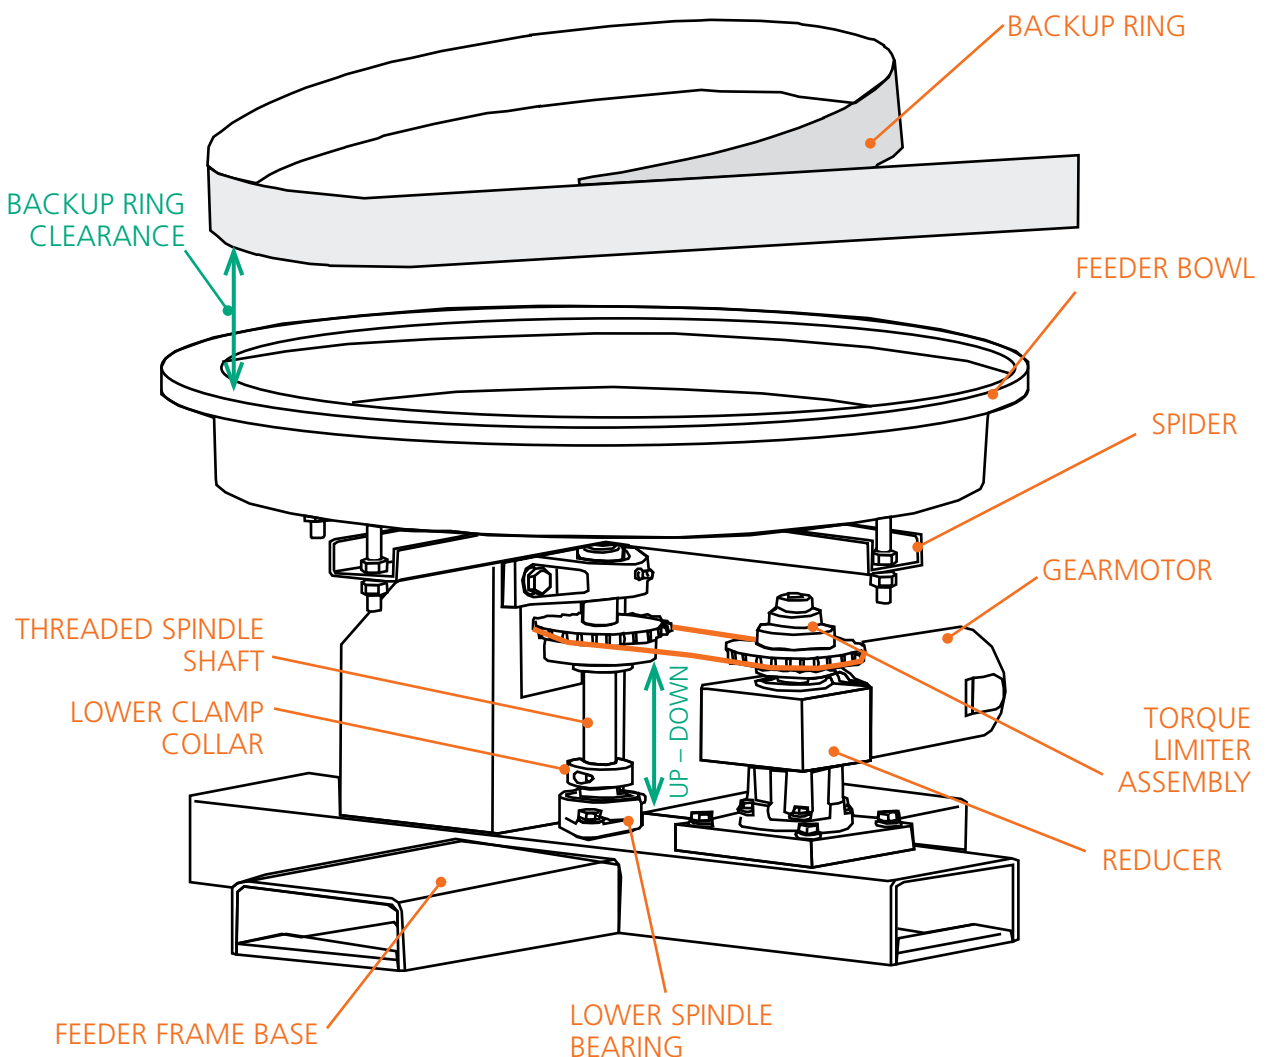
OLDER STYLE Backup Ring Clearance Adjustment
